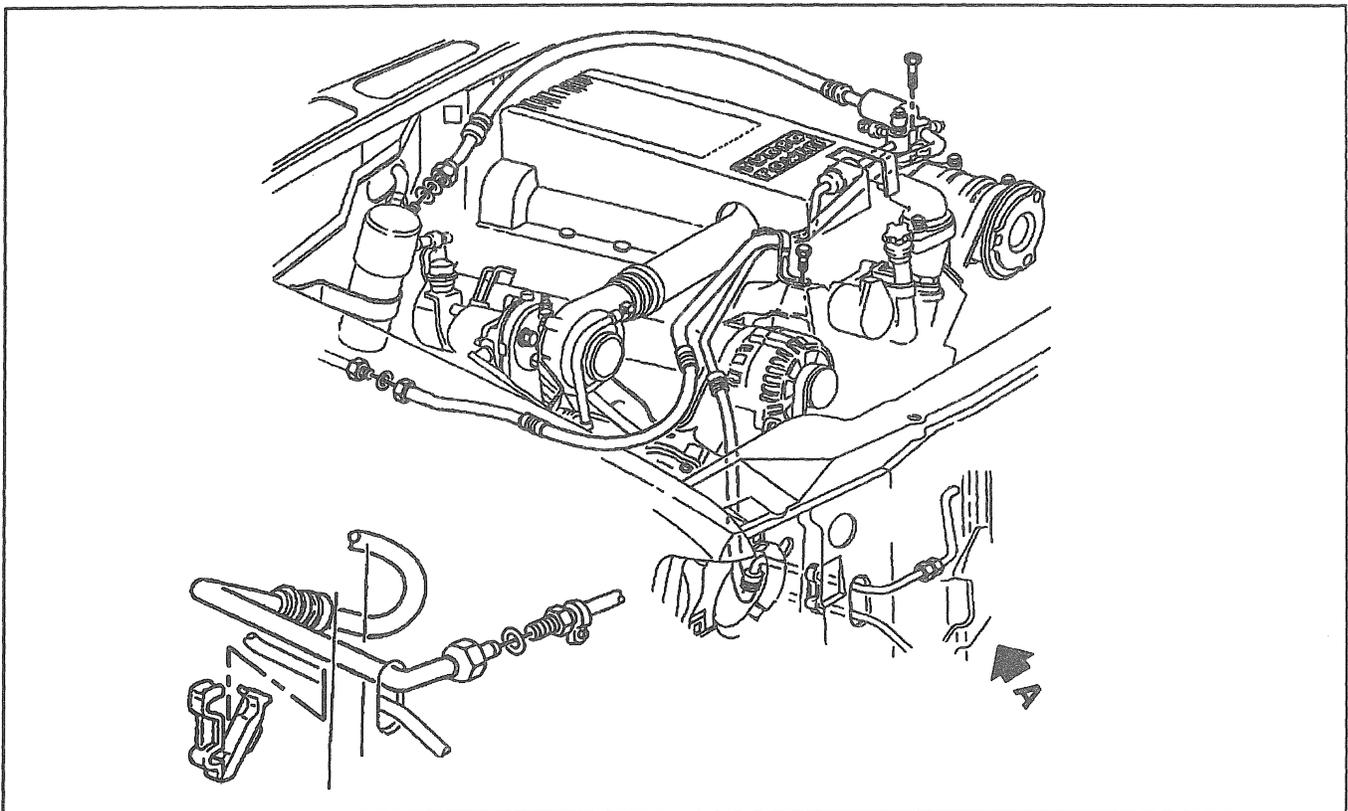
Compressor and Condenser Hose Assembly (6.5L Diesel Engines w/Aux. A/C)
